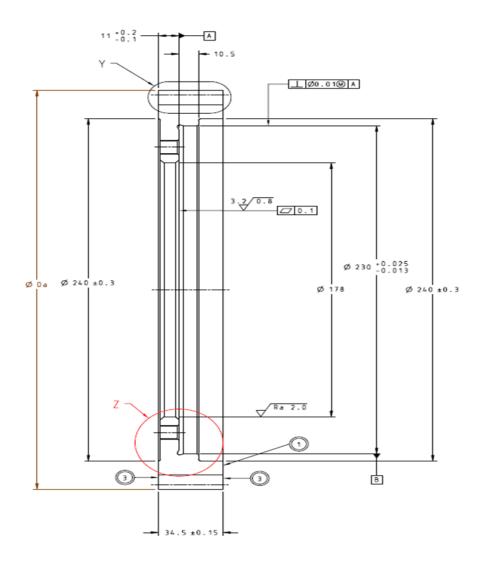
Technical drawing of ring gear (Extract from CAD Drawing GFT – CTP)
